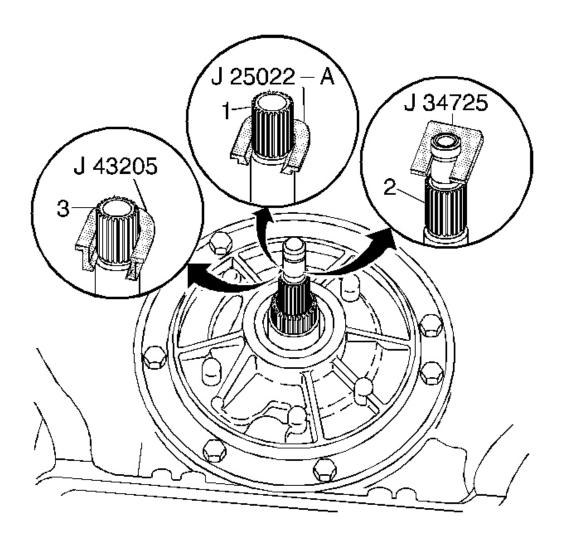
Identifying Turbine Shaft O-Ring Courtesy of GENERAL MOTORS CORP.
